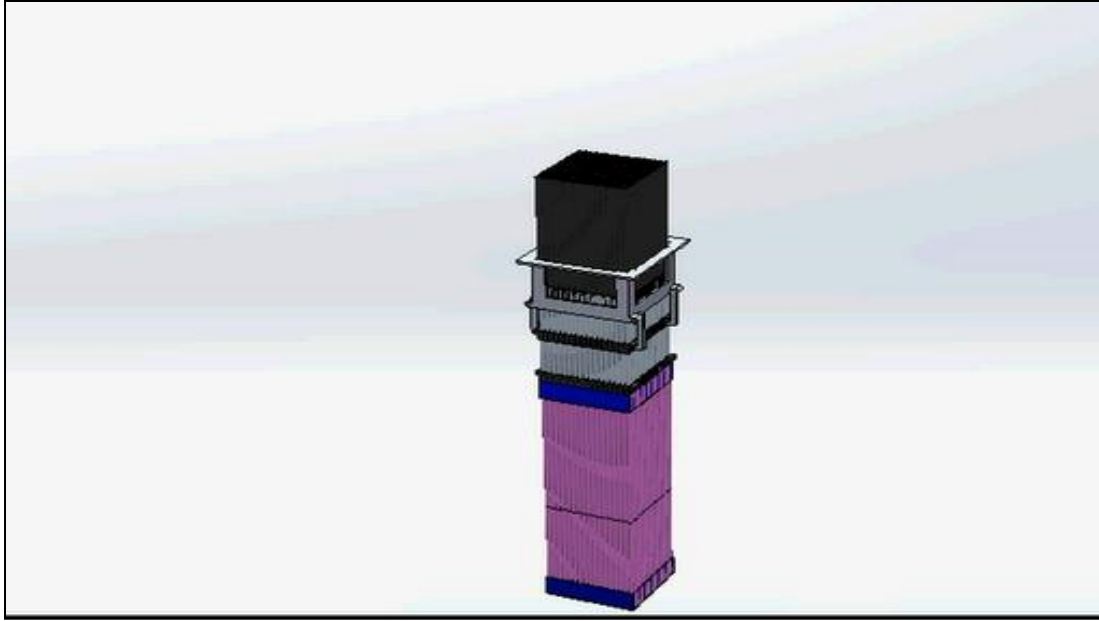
The fuel rods being pushed into the tube assembly via the driving rods
